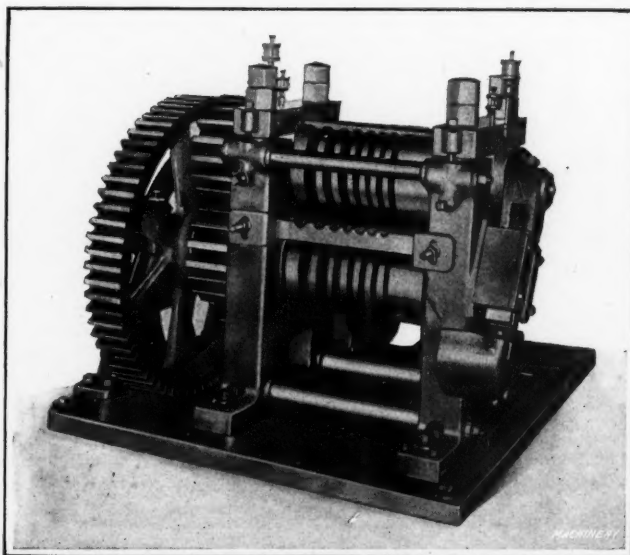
Tapered Forging Rolling Machine for General Light Work
